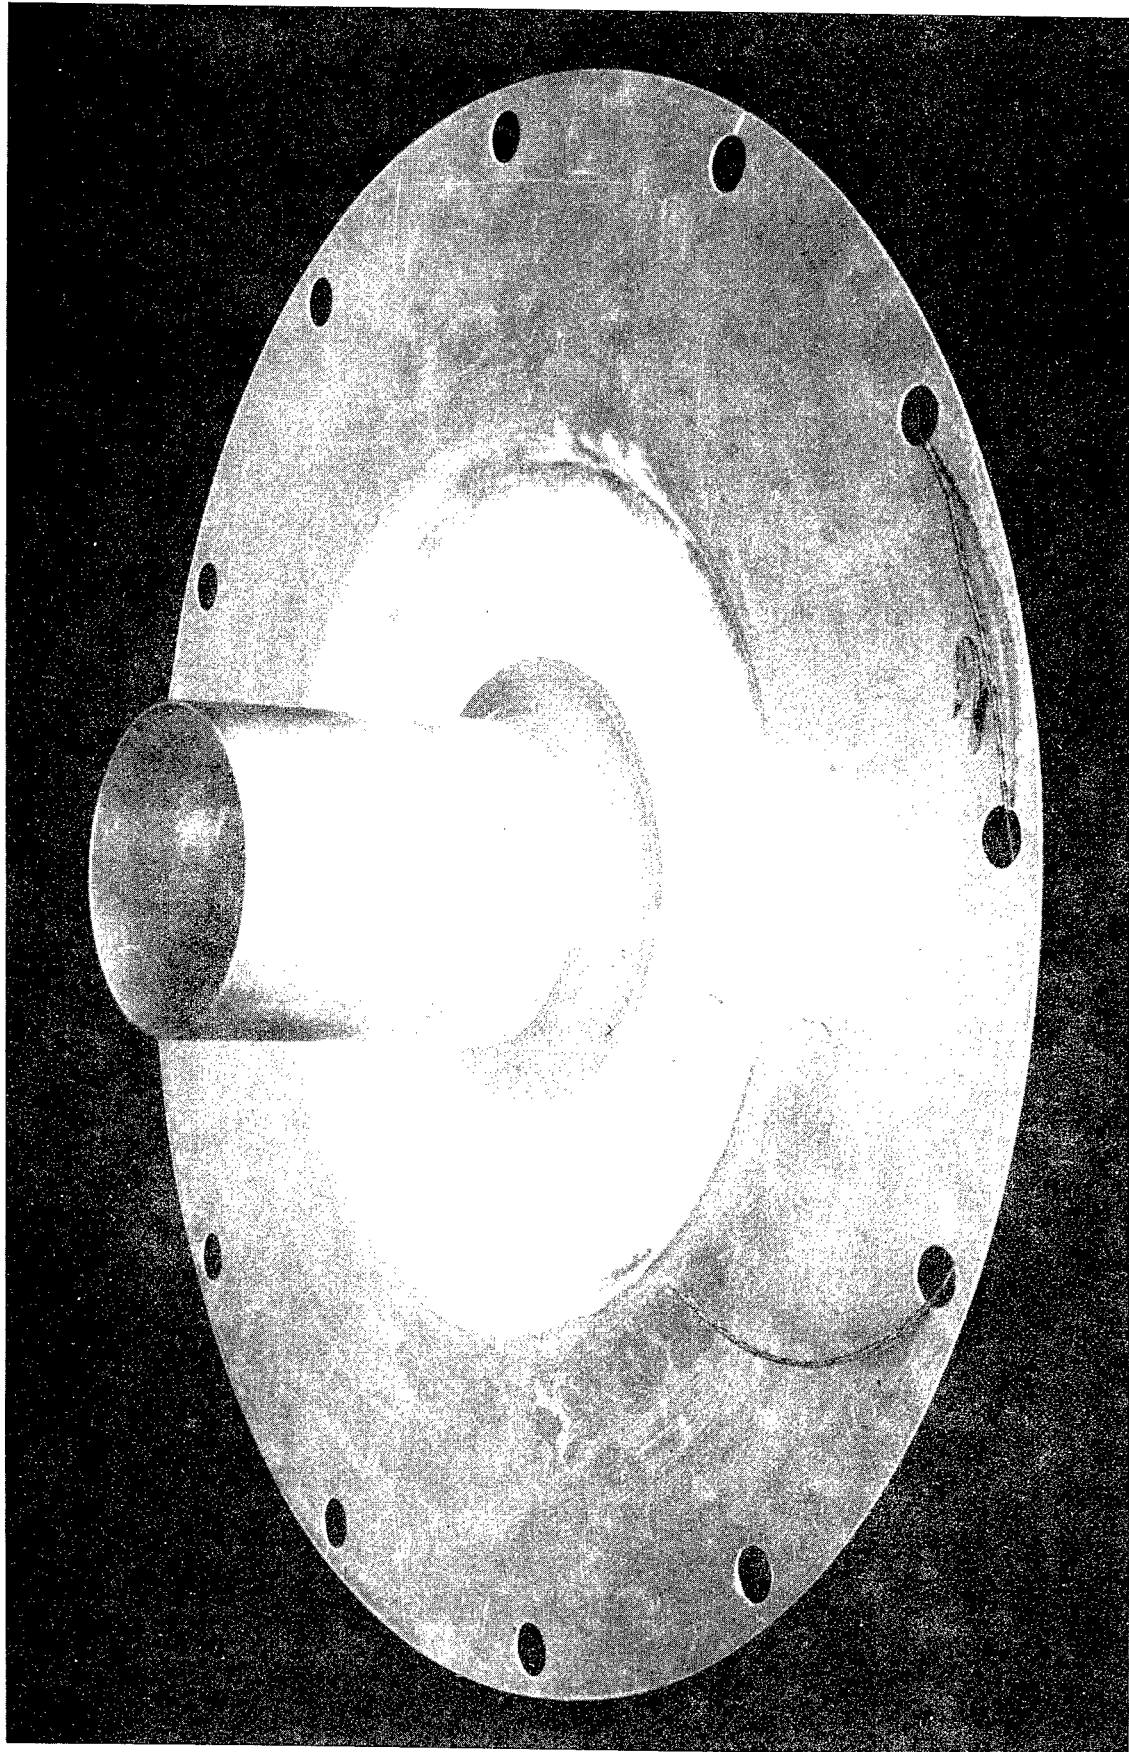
Continuous-Fillet Evaluation Specimen - Recessed Disc
